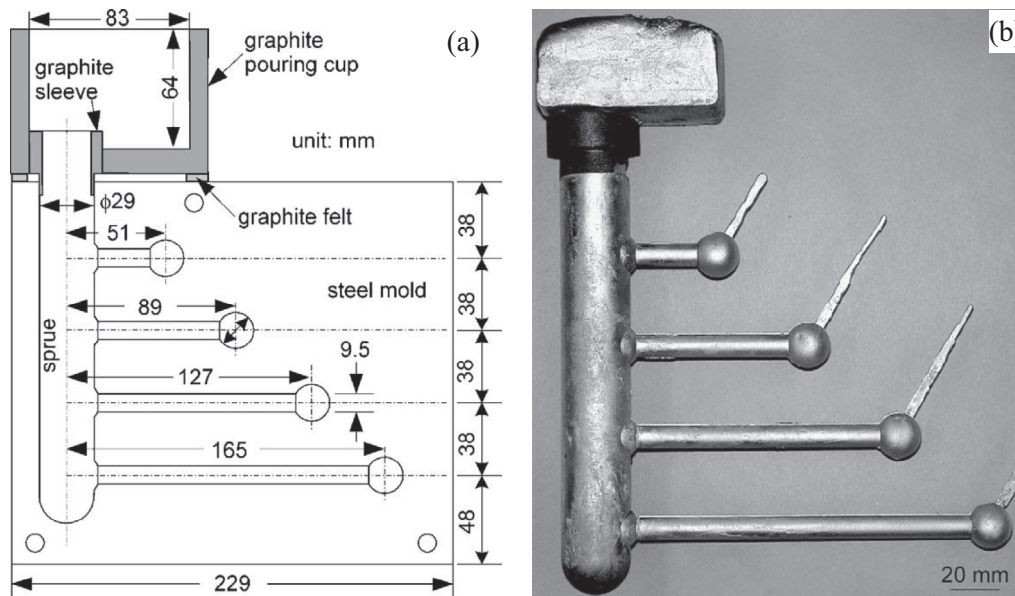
Another constrained mould casting, (a) schematic mould, (b) casting [28].
